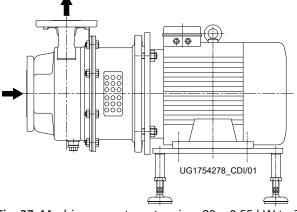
Machine mount, motor sizes 80 = 0.55 kW to 225 = 45 kW
